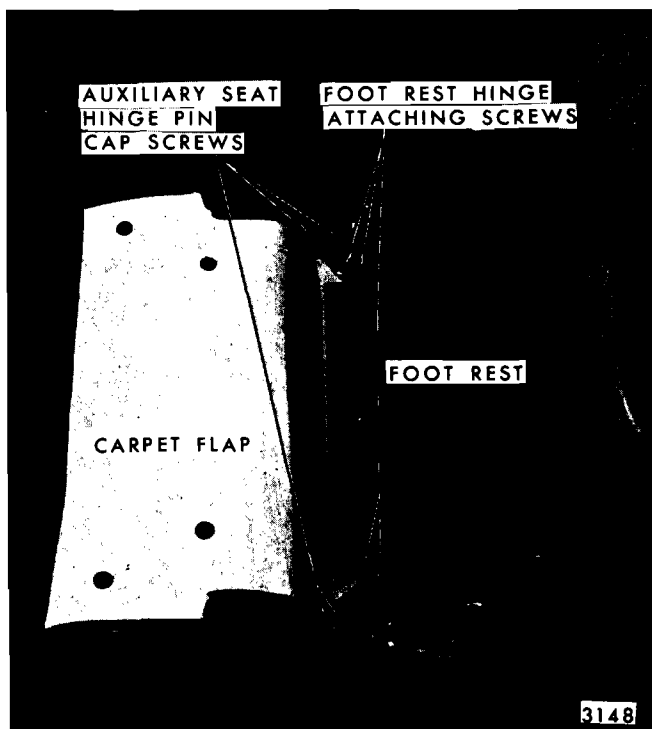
Auxiliary Seat Assembly - Removal and Installation - Cadillac Limousine Styles
